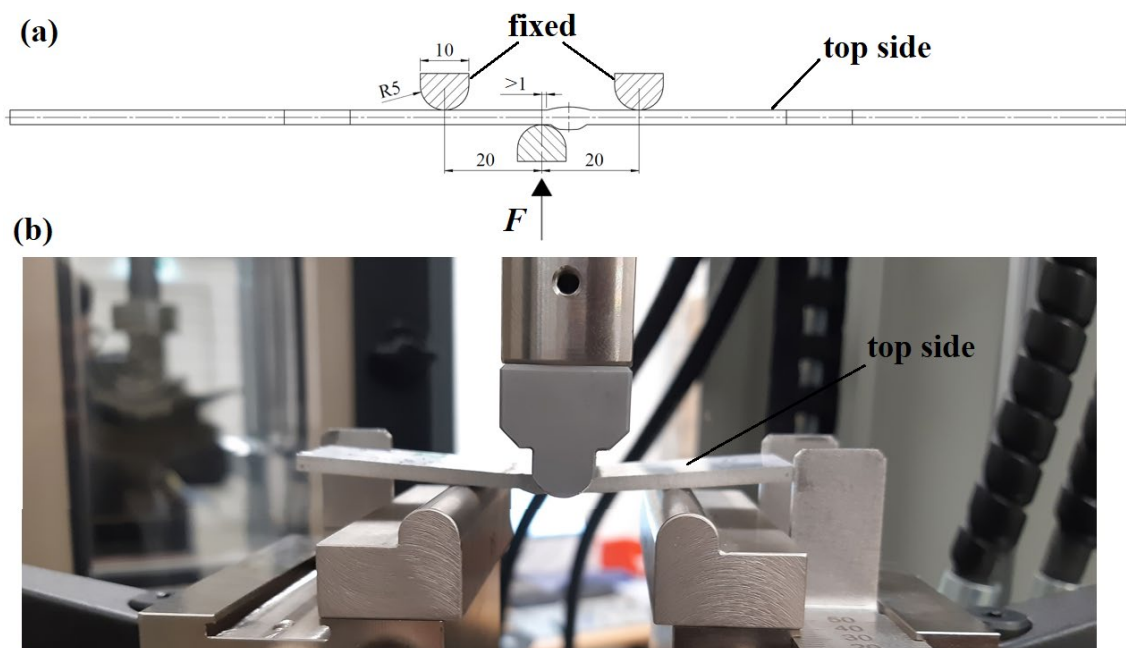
Butt joint specimen HCF 3-point bending: (a) testing setup, (b) specimen in the device
